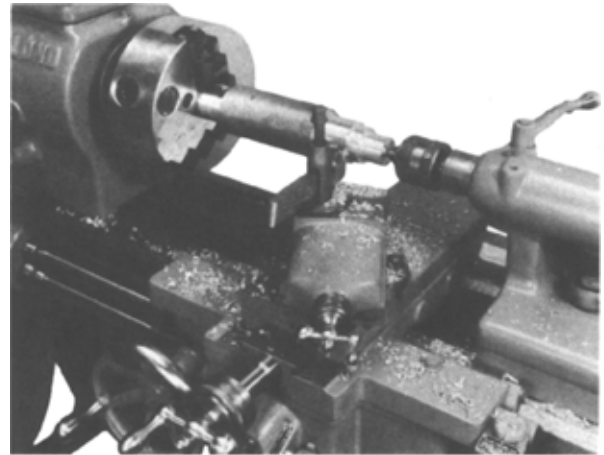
JAW CHUCK HOLDS WORK SECURELY AT HEADSTOCK END.
